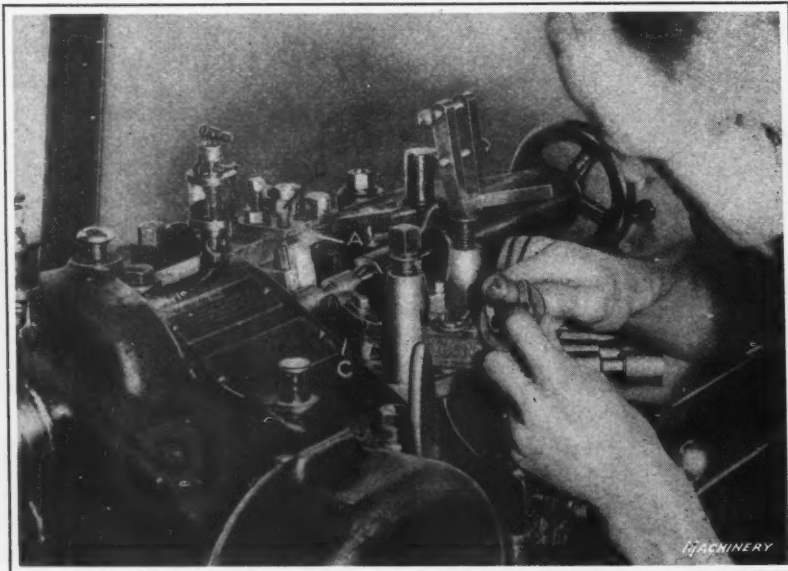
Lathe equipped with Special Tool-head for forming the Shoulders, turning the Ends of the Screws, and finishing the Neck
